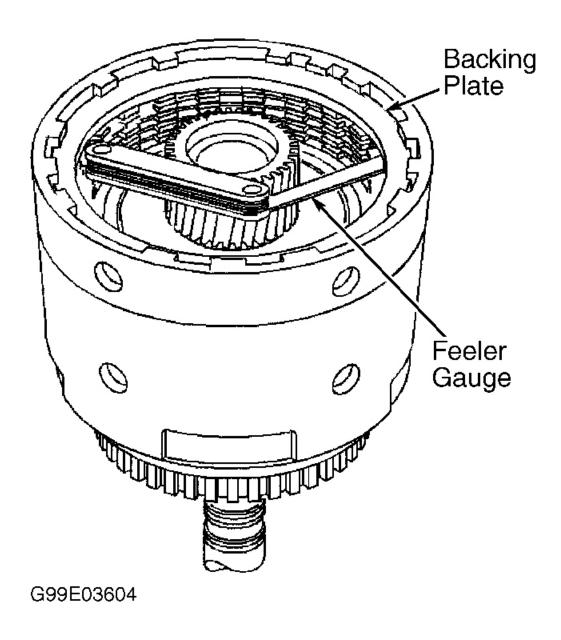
Measuring 3-4 Clutch Pack Clearance Courtesy of GENERAL MOTORS CORP.
